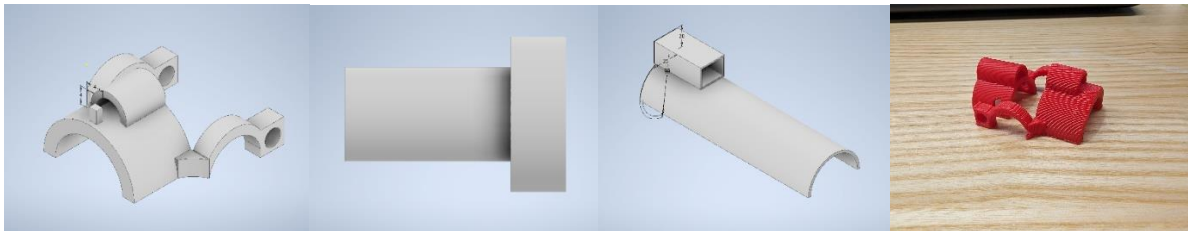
, Figure 8, Figure 9 Figure 10: Initial CAD Design of finger attachment, bolt, and linear actuator housing along the arm, and the 3D printed model.
